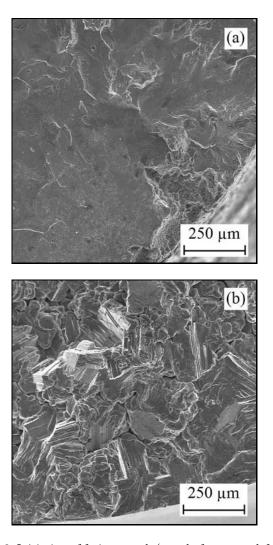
Initiation of fatigue crack (mostly from cast defects on the surface of the specimens), Mg-alloy AZ 91D: (a) initiation from the surface of the specimens, (b) a cast defect reaching to the surface of the specimens.
